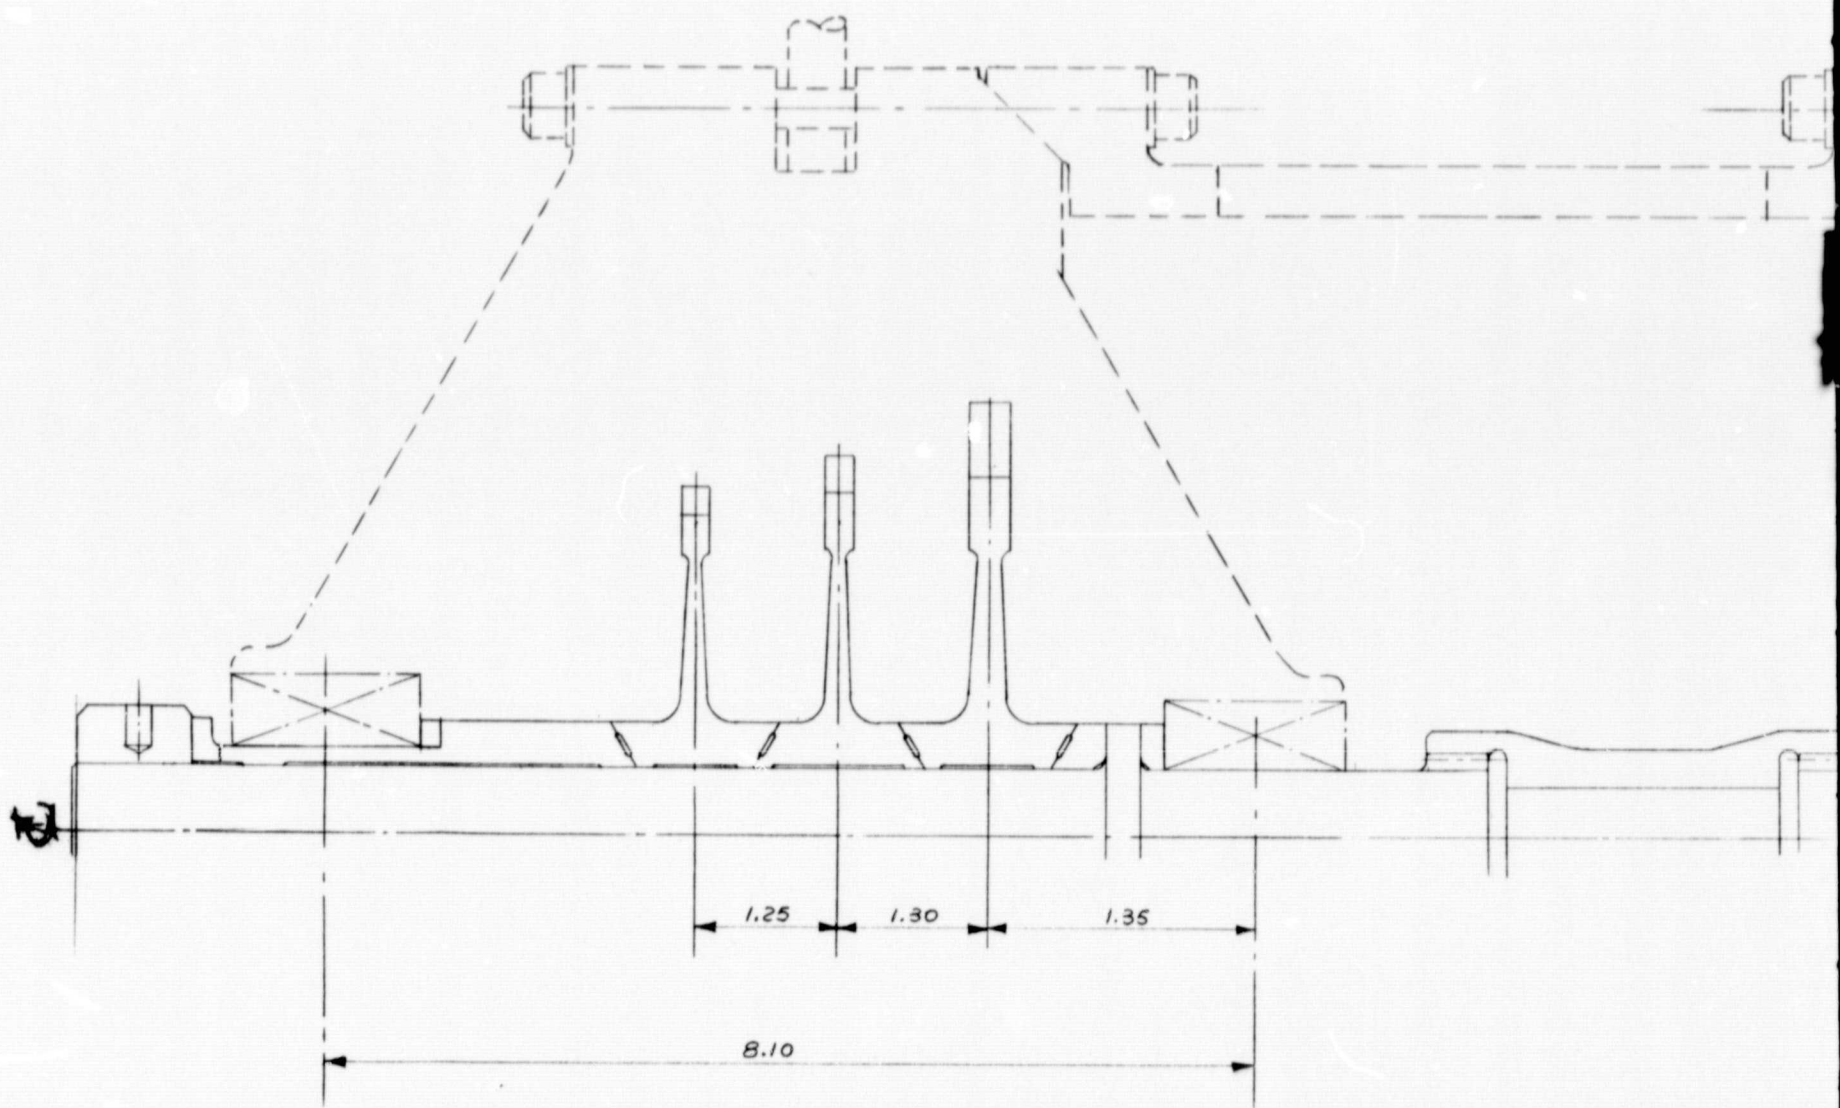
Reference Design Layout for the Three-Stage, Four-Bearing Cesium Vapor Turbine.
